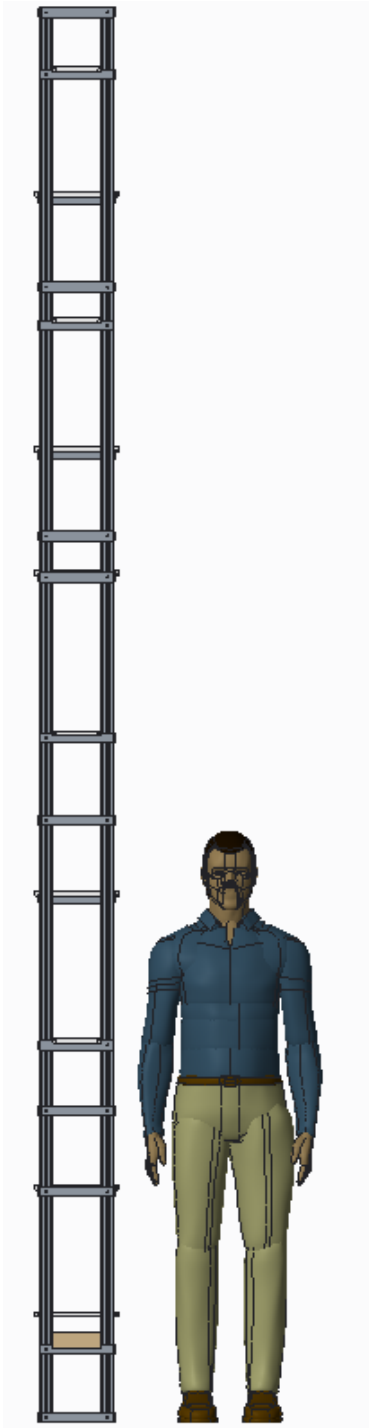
Final design of the assembly fixture compared to a male with the length of 1.74 meters.
